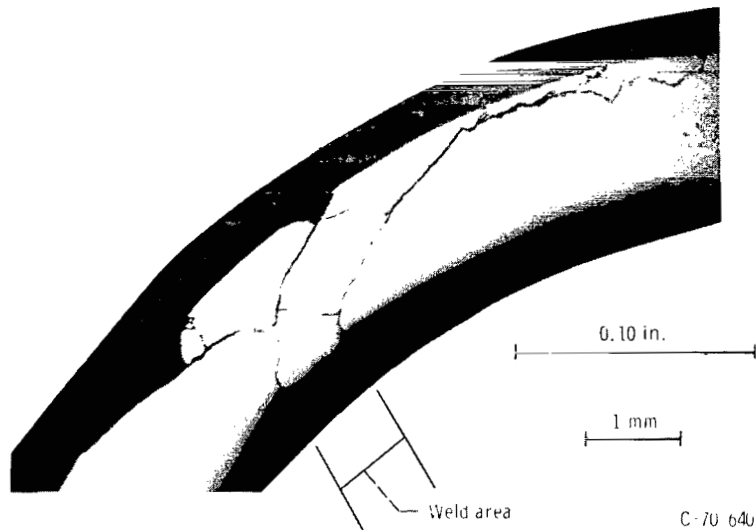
Sectional view showing typical cracks between weld area and outside surface of ball. Section taken parallel to and through running track.
